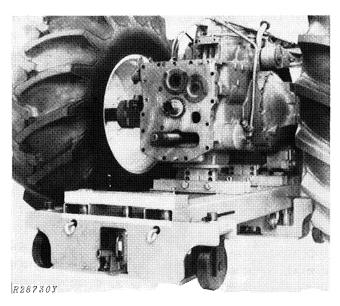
Transmission and Rear End Assembly Separated From Torque Divider
